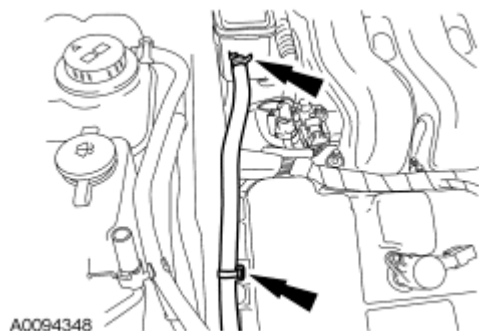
Locating Power Steering Reservoir Hose & Retainer
